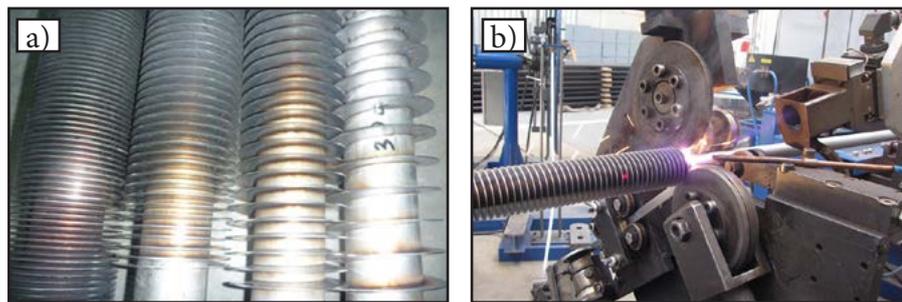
Fin tubes made of alloy Inconel 625 at Energoinstal SA (a), laser welding of tubes (b) [2]
